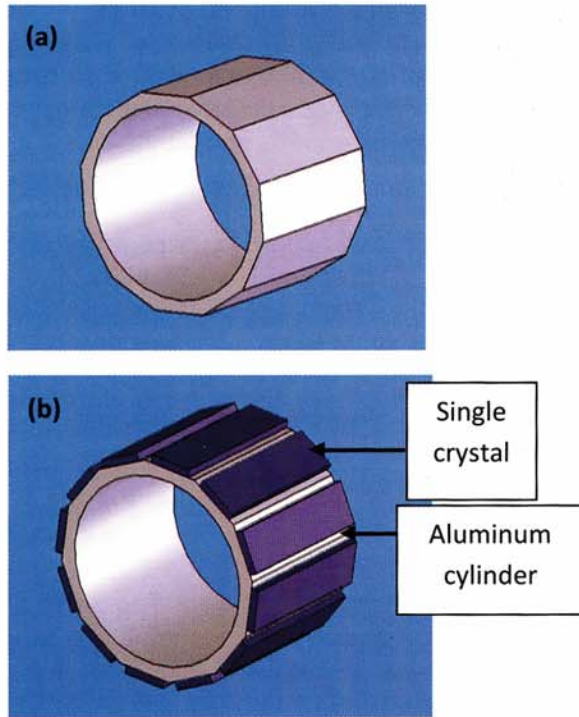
(a) Twelve flat faces cylinder (b) Twelve single crystal plate bonded cylinder.
